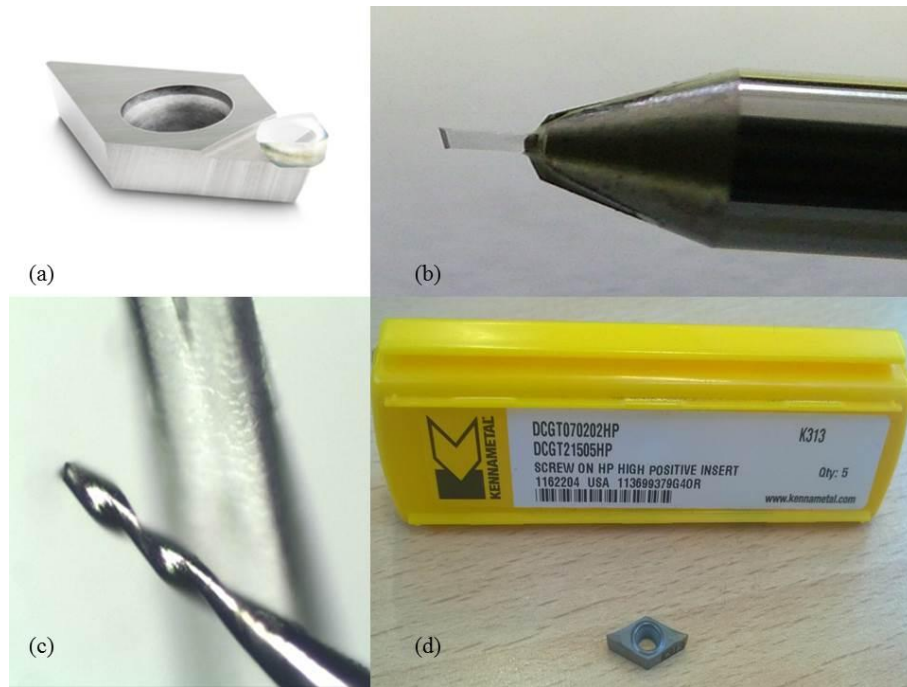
Cutting tools used in the study (a) diamond insert (b) diamond micro-milling tool (c) tungsten carbide micro-milling tool (d) tungsten carbide insert
